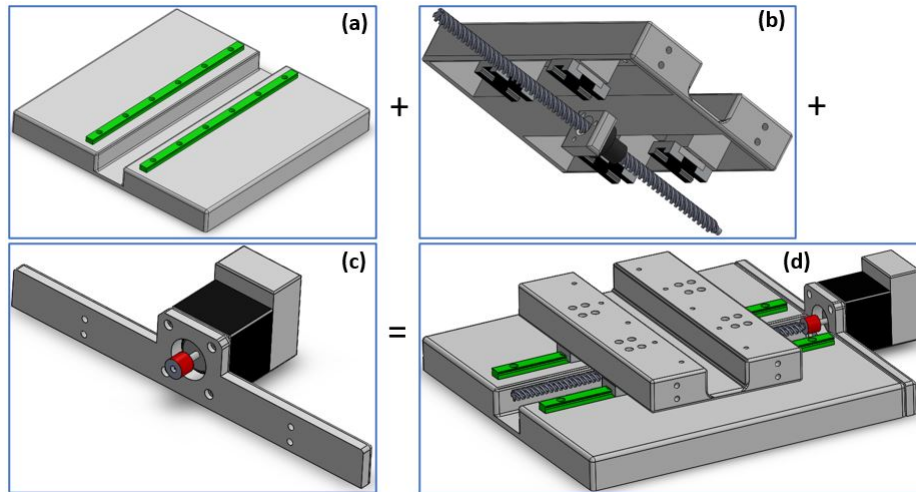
(a) The base plate mounted with two linear guides, (b) the middle plate, the anti-backlash leadscrew and four carriages assembly, (c) a stepper motor and bracket assembly and (d) the full x-axis positioning stage.
